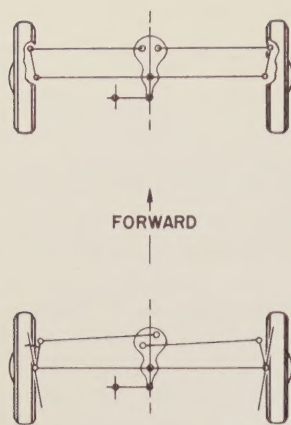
Another arrangement of steering arms is necessary when the suspension design makes it impossible to project the steering arms rearward at a location behind the wheel spindles. A basic design in which the steering arms are positioned ahead of the wheel spindles is shown at the top. It also is probable, however, that the brake elements of the wheel make it impossible to use a steering arm in this position. The designer then moves the arms inward and compensates for this change in the location and movement of the inner ends of the tie rod, as shown below.
